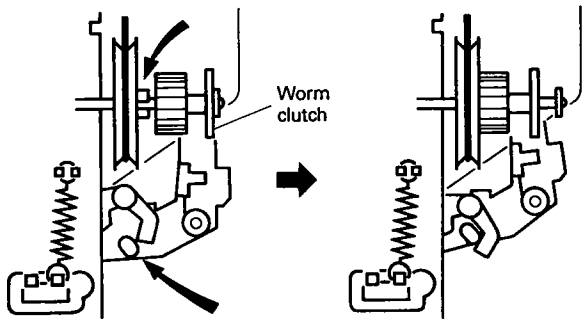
(a) Not locked Fig. 1-1-9(b) Lock engaged
